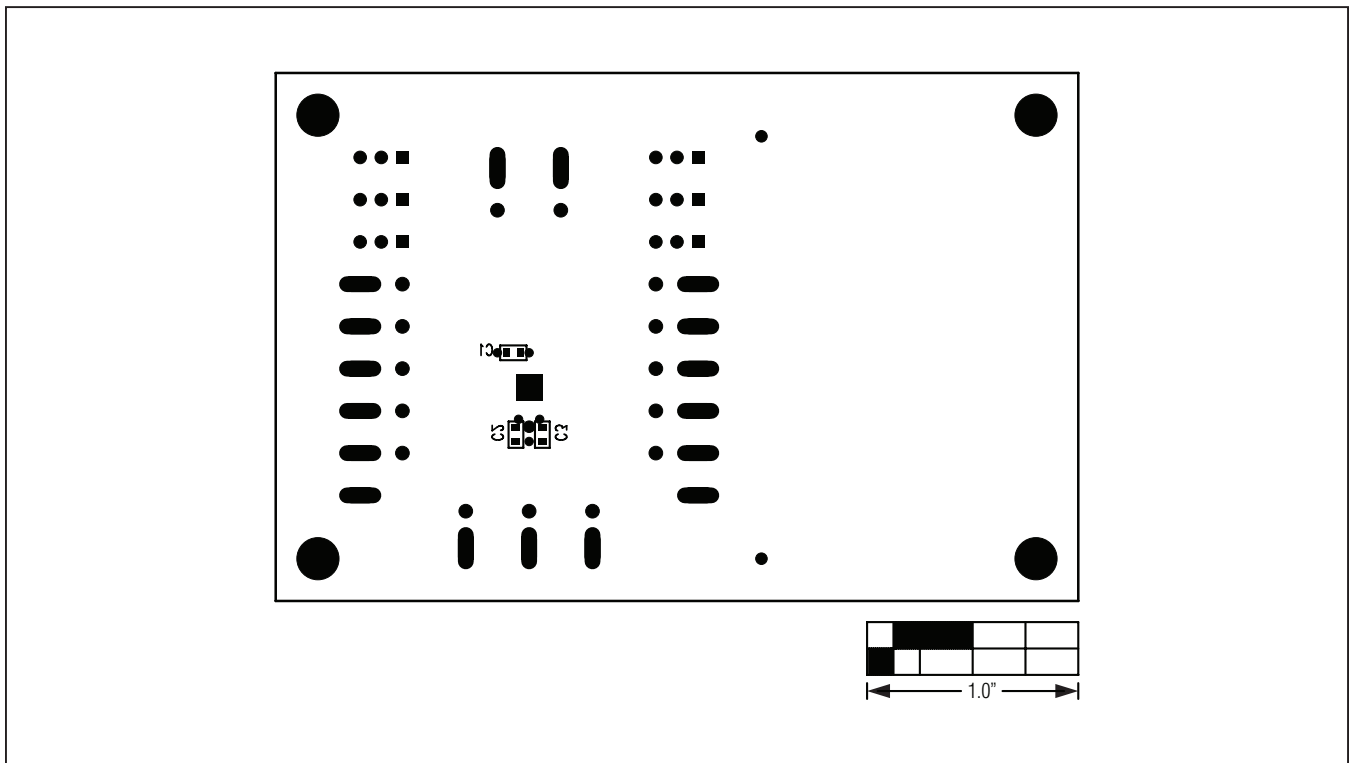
MAX14778 EV Kit Component Placement—Solder Side
